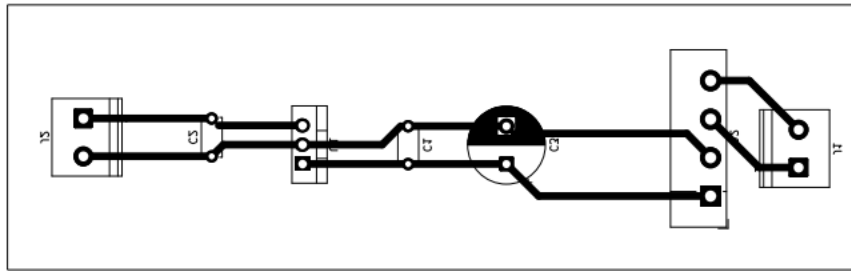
Black-and-White PCB Mask Print for Toner Transfer
